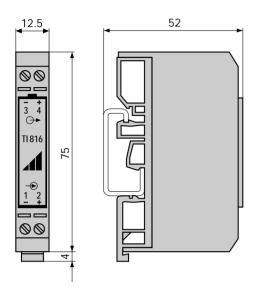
SINEAX TI 816 in carrying rail housing N12 on G-type rail EN 50 035 – G 32.
